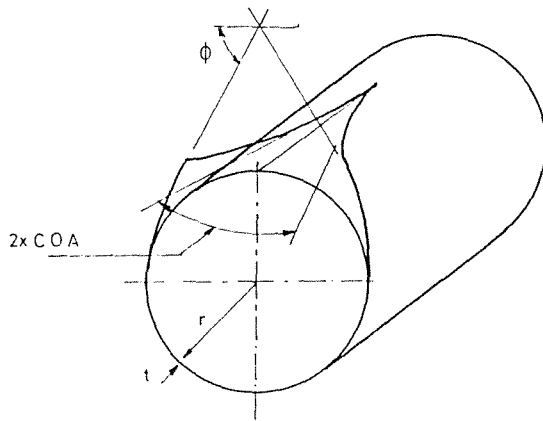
Ductile fracture of pressurised cylindrical vessel or pipeline
